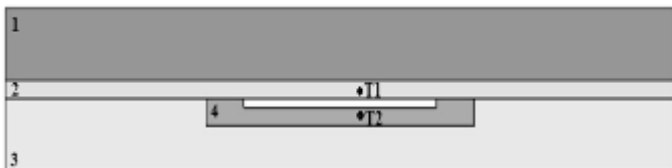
Hybrid mould configuration and setup of thermocouples: 1-steel injection plate; 2-insulating plate; 3-steel ejection plate; 4-moulding block (resin or steel): T1 and T2 - thermocouples.
